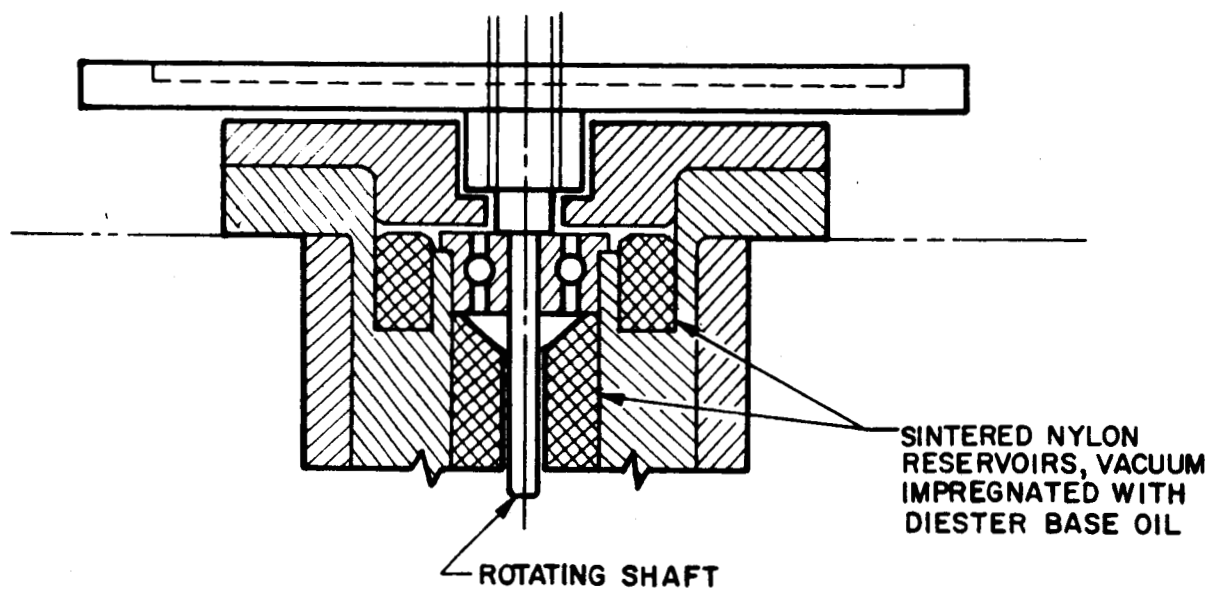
RADIOMETER SPINDLE ASSEMBLY
